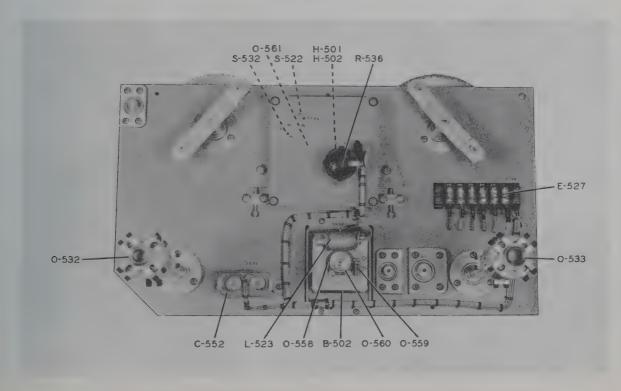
Radio Transmitter T-454/FRT-26, IPA Plate Tank Drive Assembly, Top View.
